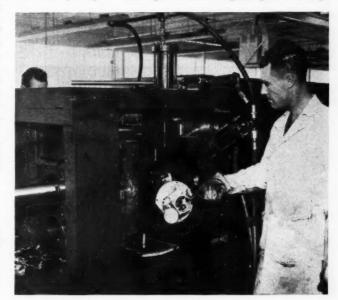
Crankcases are die-cast in this Reed Prentice No. 3G Machine. This workpiece requires a fourpiece die with three inserts, and is produced in four separate draws.
